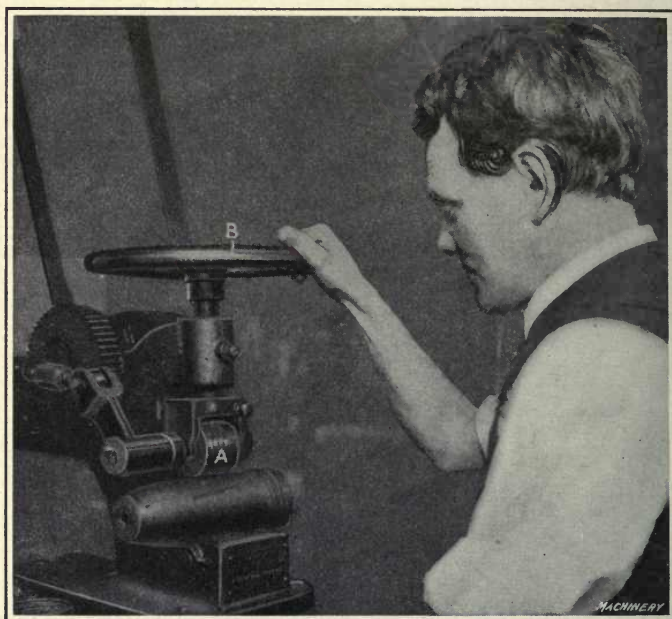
Stamping in a Hoiden-Morgan Rotary Stamping Machine
